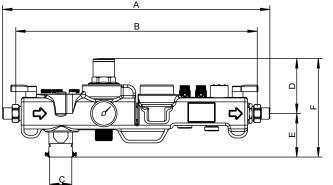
Position drawing of GENO-therm® filling device Komfort
